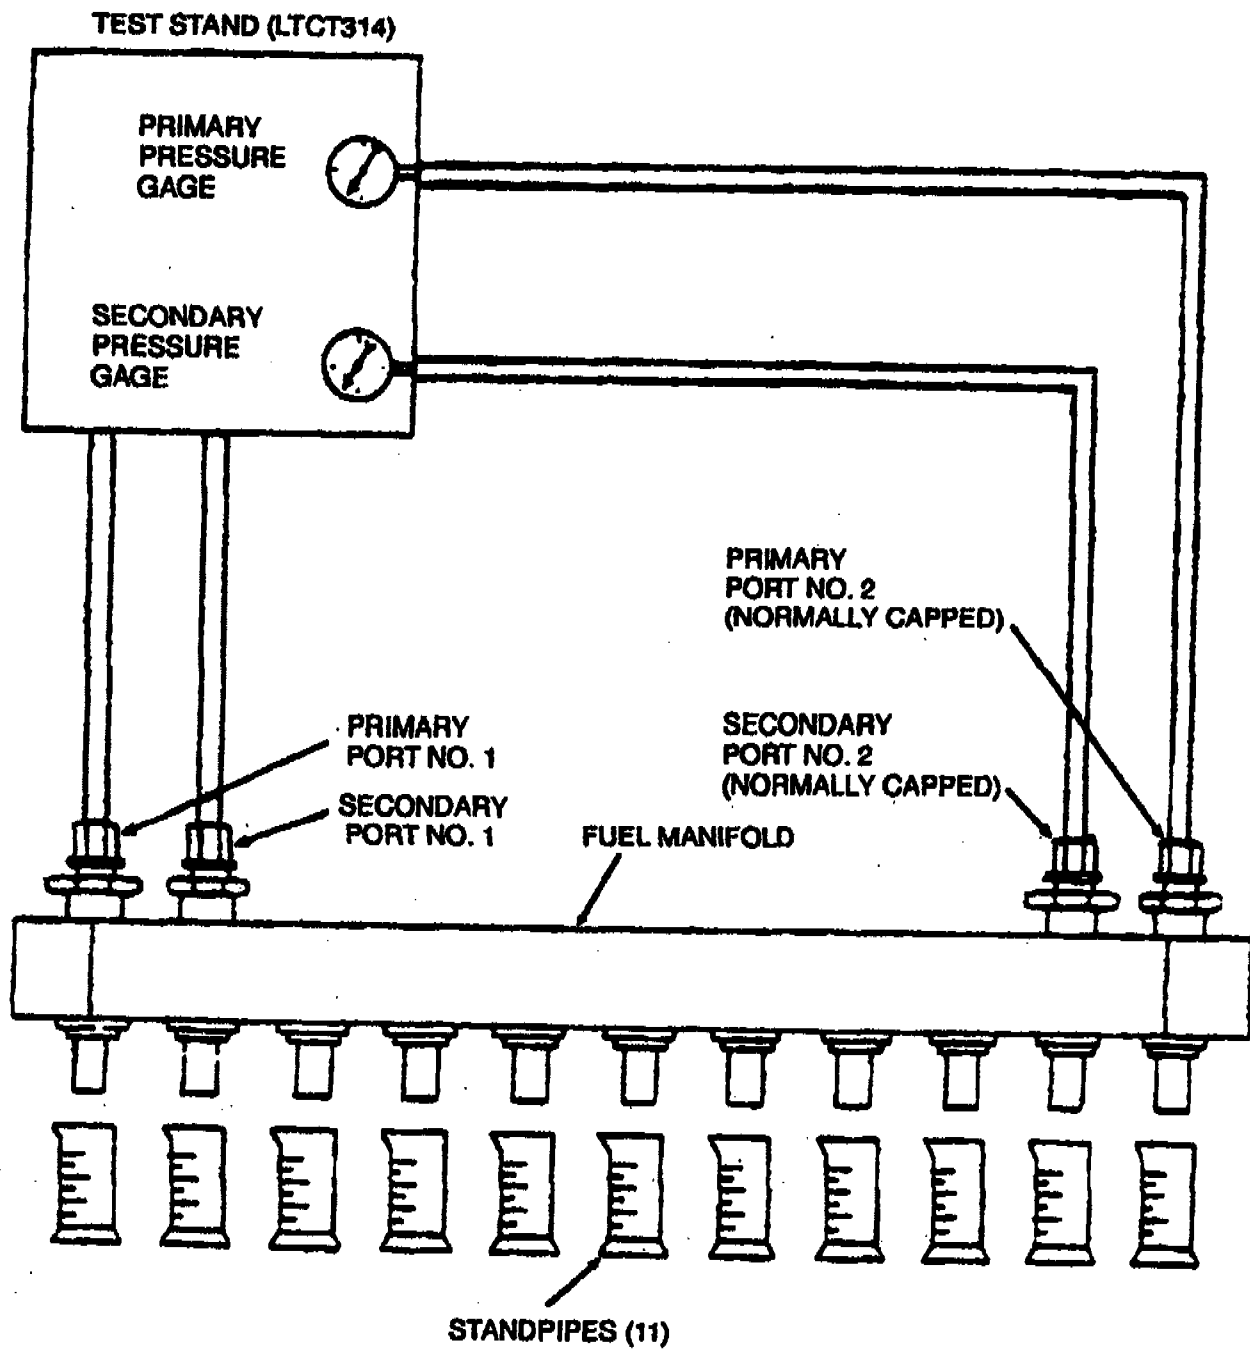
Functional Test Schematic of Fuel Manifold Assembly.
